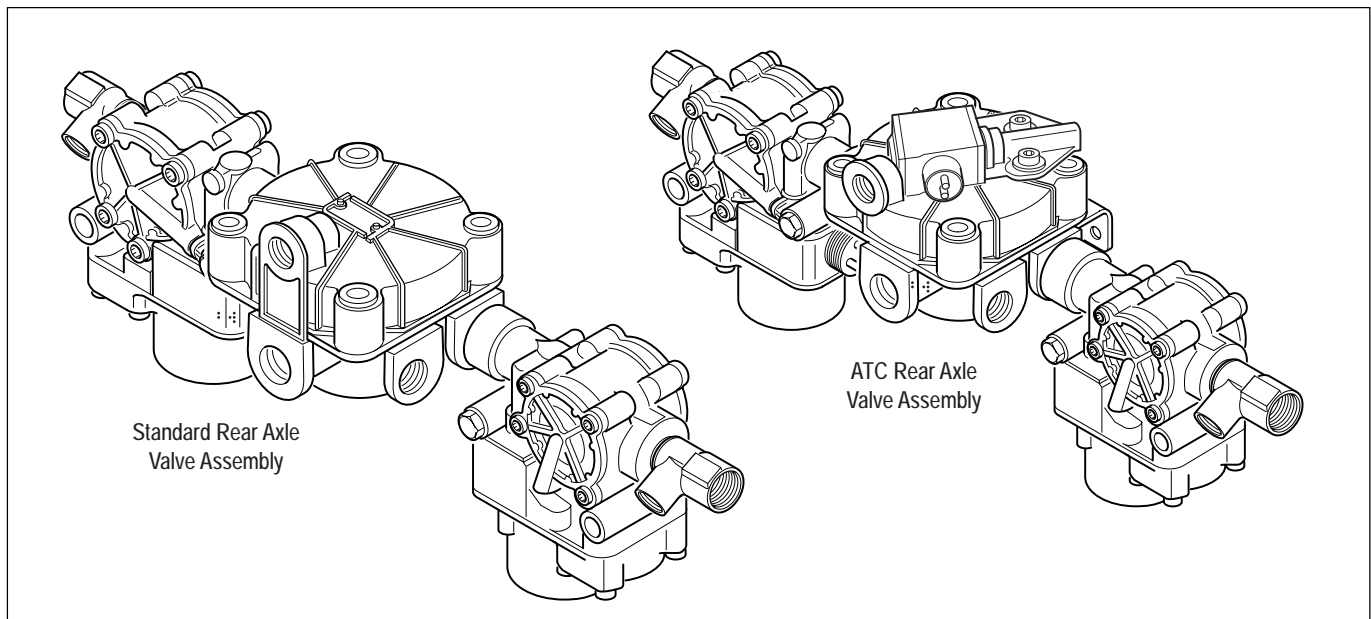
Rear Axle Valve Assemblies – Standard and ATC Version Shown
